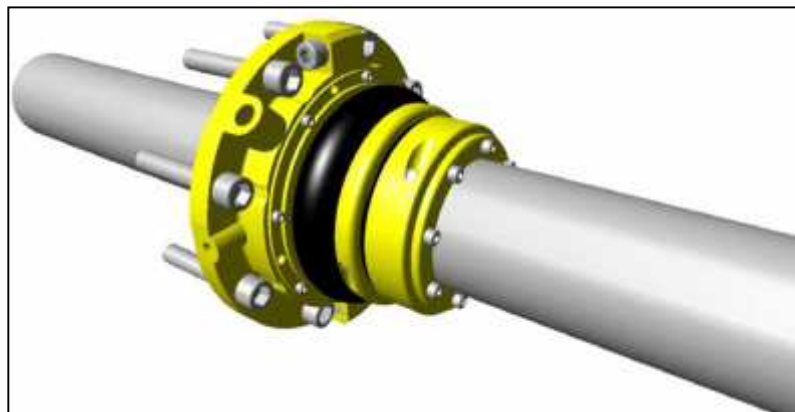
Overview of a Stern Tube Seal Mounted to a Shaft
